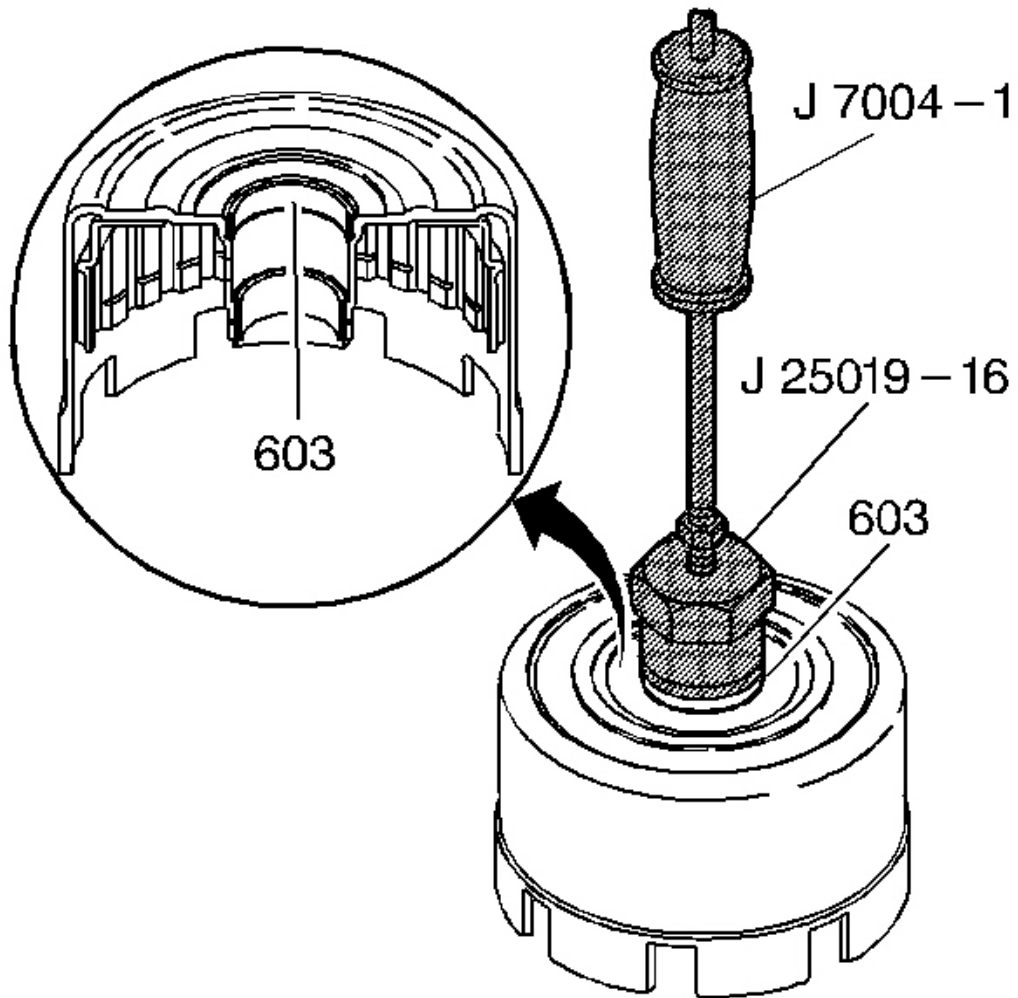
Identifying Reverse Input Clutch Front Bushing
